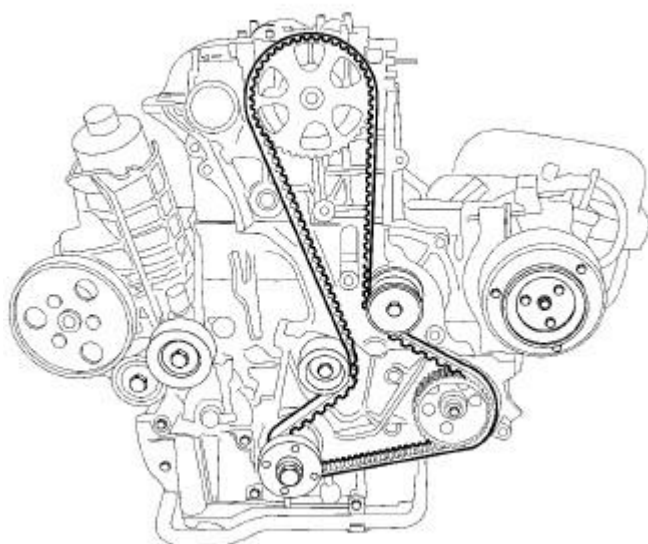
Crankshaft Timing Belt Sprocket & Bolt
